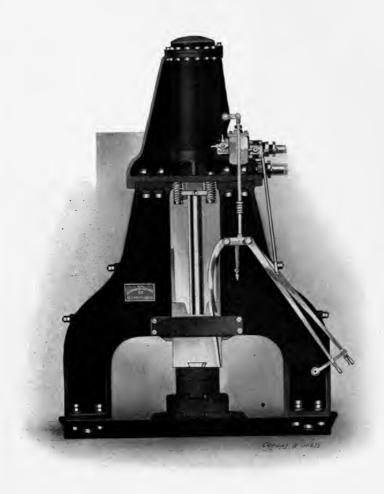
Double-stand, Steam Hammer. (Alliance Machine Co.)
